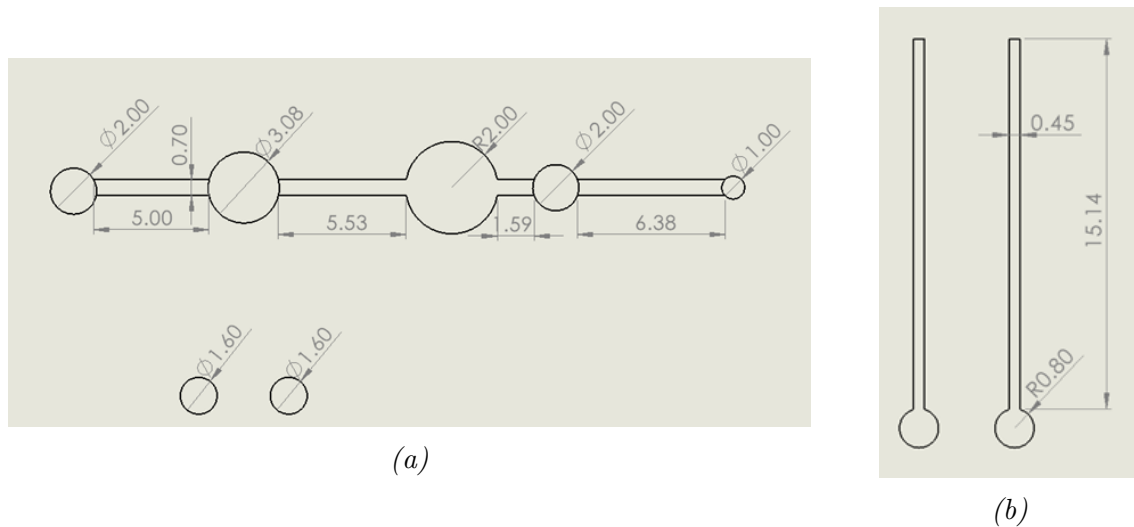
The technical drawings of the first Quake-valve design with top view of the flow layer (a) and control layer (b).
